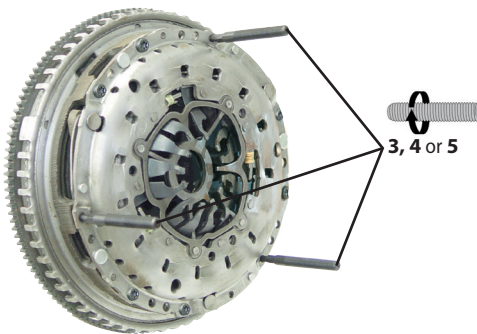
Positioning and securing the clutch pretensioning device "1".
